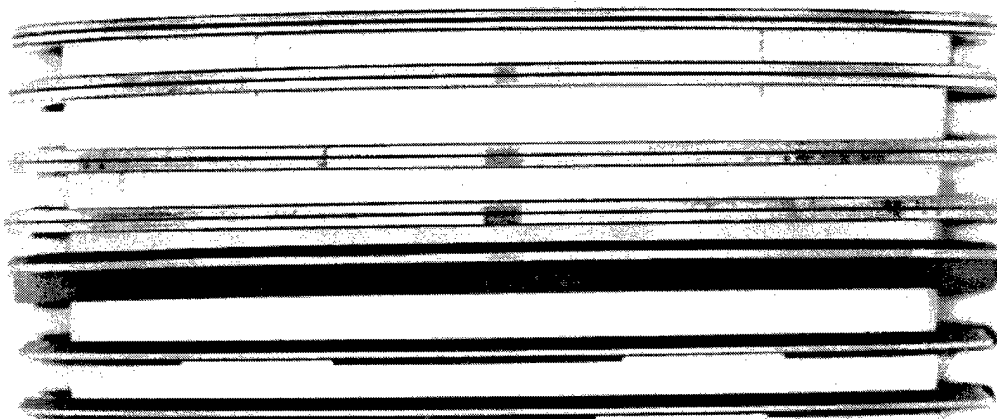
6V53T Test 39, Cylinder 2-R, Rings
